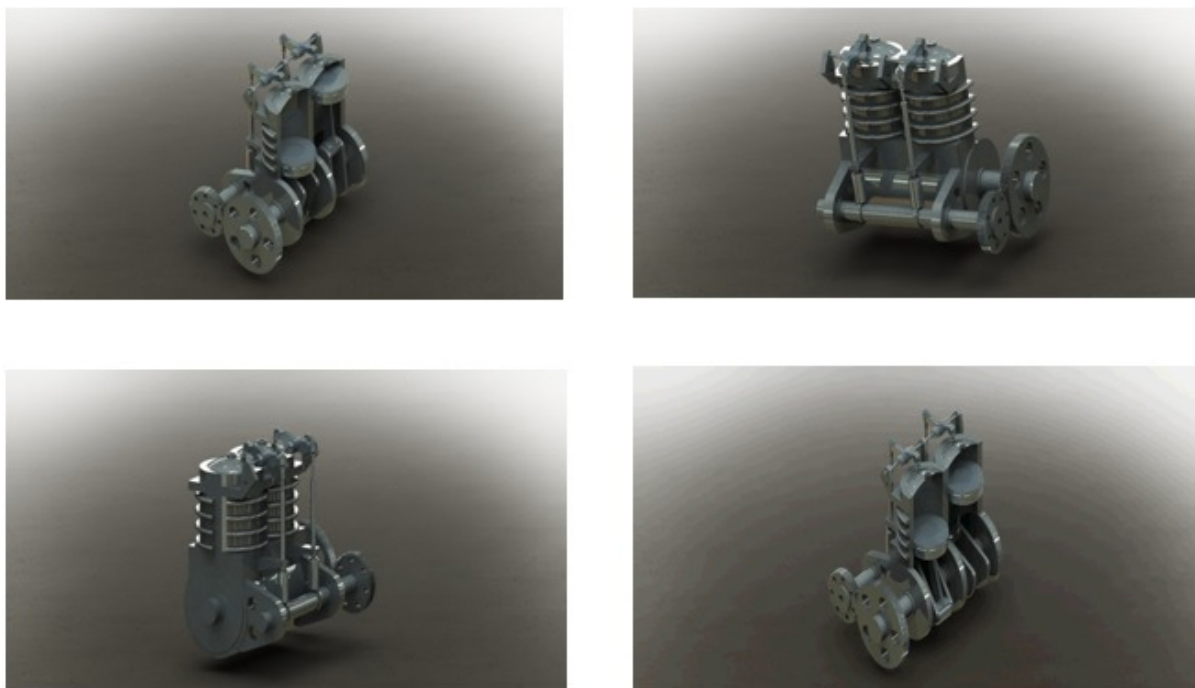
Design of the 2 stroke auto-rickshaw engine
